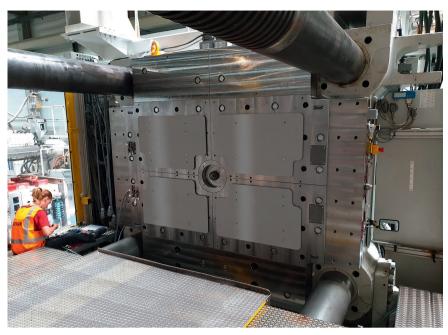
Installation situation in the mold room of the Engel duo 2700: magnetic mold clamping plate in front of hot runner adapter plate. © A&E Produktionstechnik
